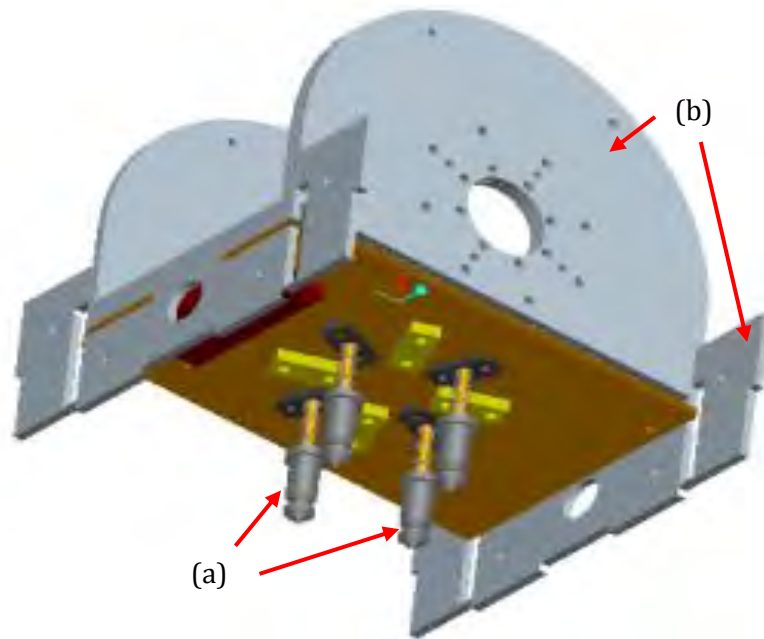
A CAD model of the inner assembly of the Wheel-less atom, showing (a) four spring bolt assemblies belonging to one docking connector, and (b) the atom's ABS plastic support structures.
